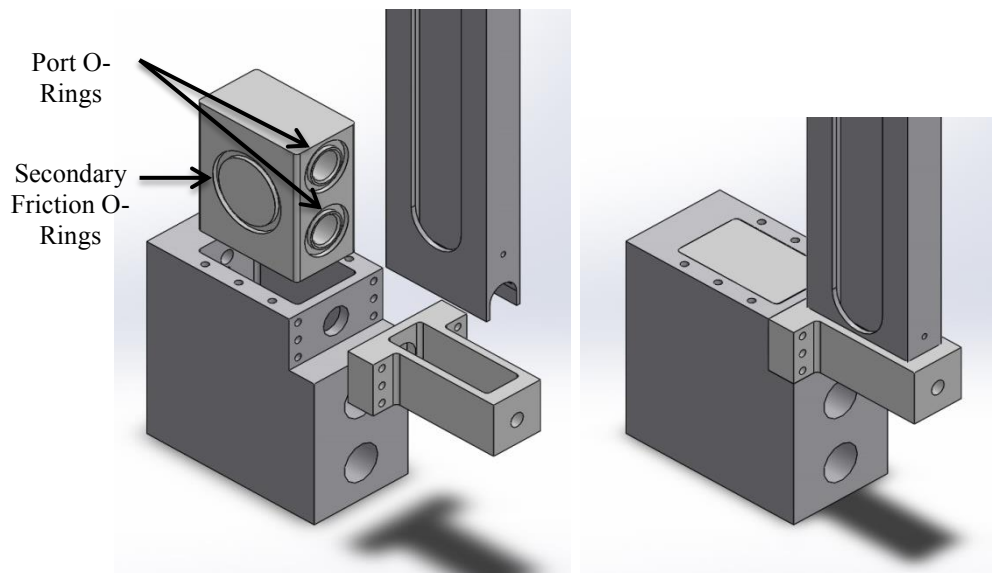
CAD Drawing of the Addition of O-Ring Slots.
